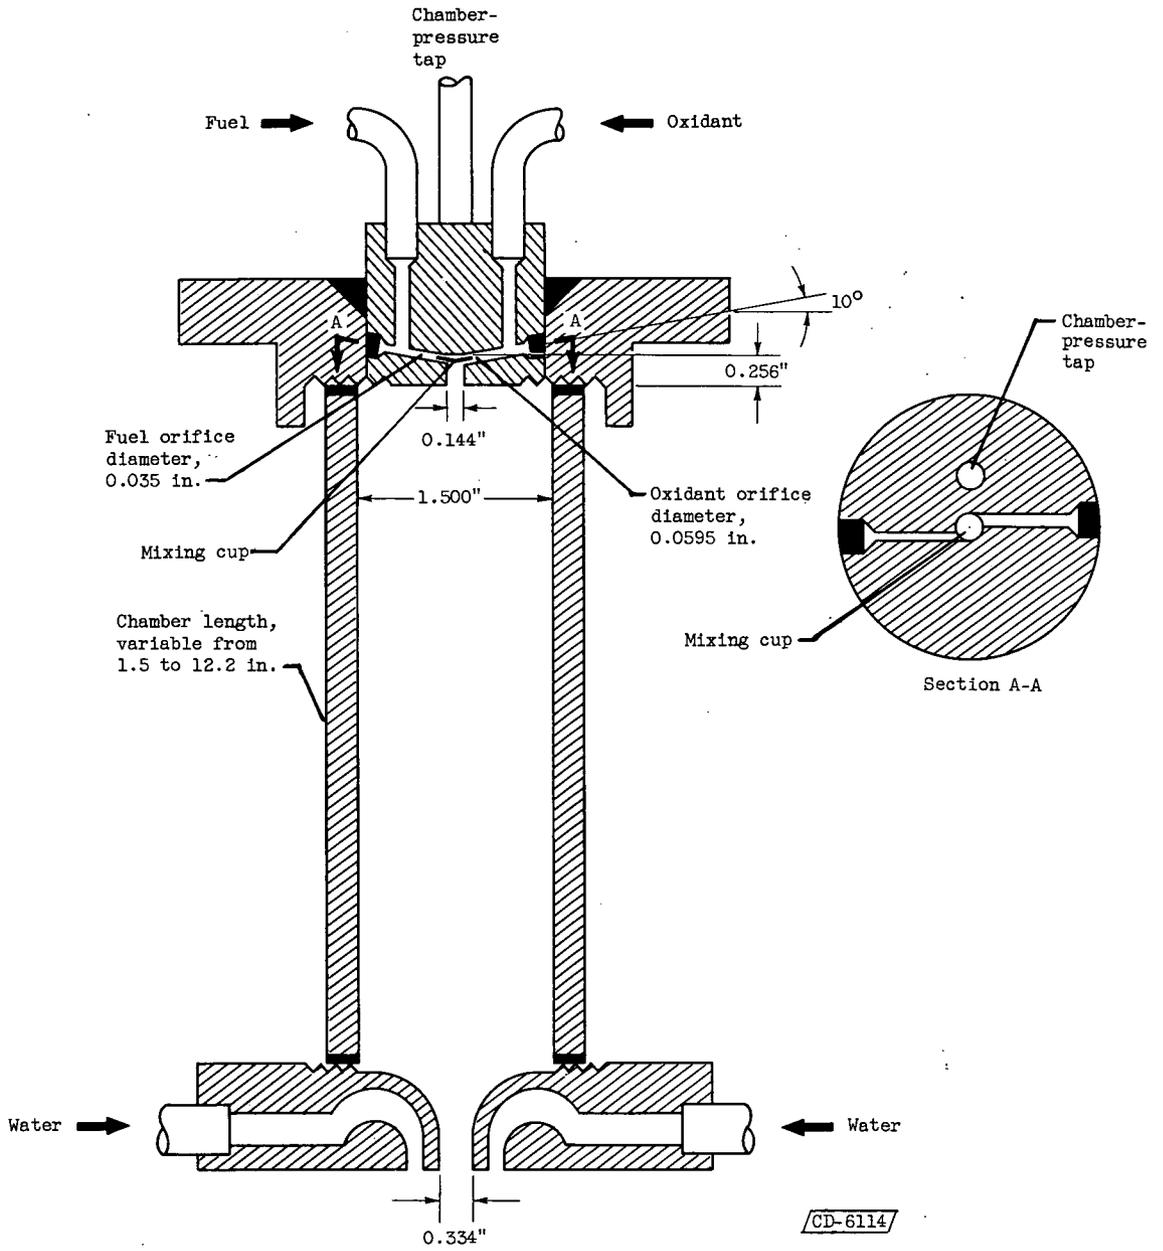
Schematic drawing of 40-pound-thrust rocket engine.
